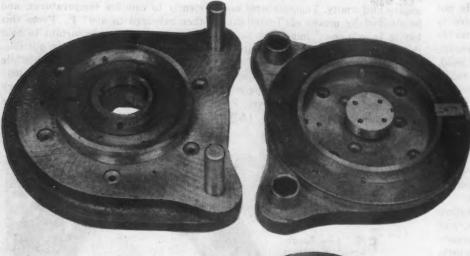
Welded dies mounted on die holders, with finished punching in foreground.
